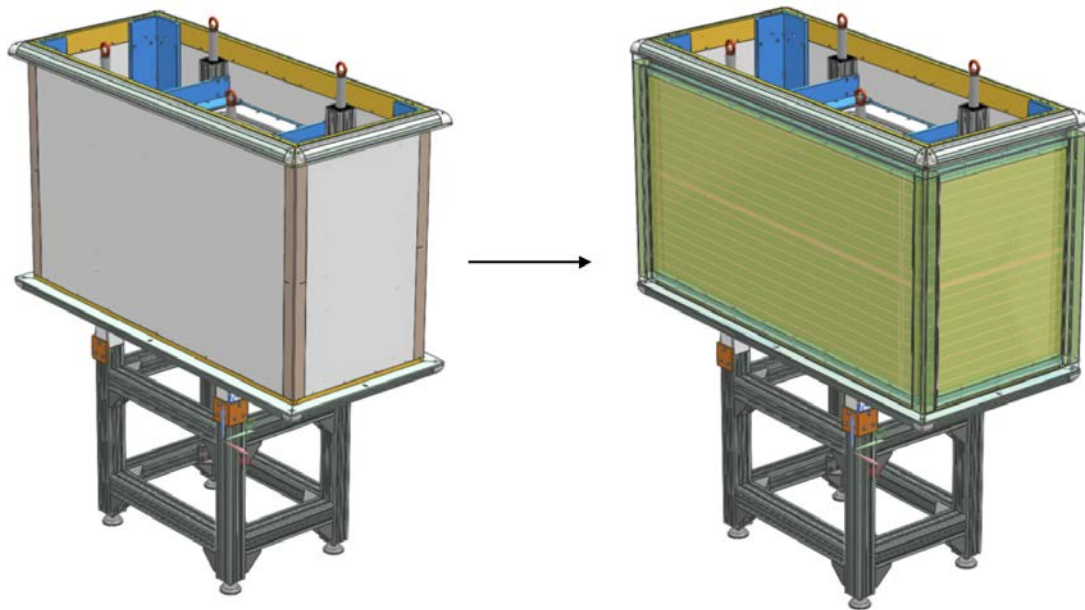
Drawing of the mold before (left) and after (right) the manufacture of a HATPC box half.
